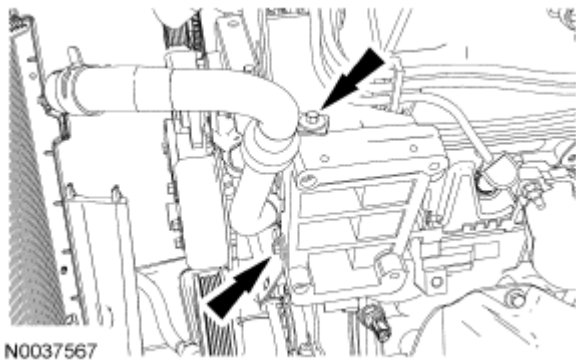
Locating Power Steering Reservoir-To-Power Steering Pump Hoses Bolts
